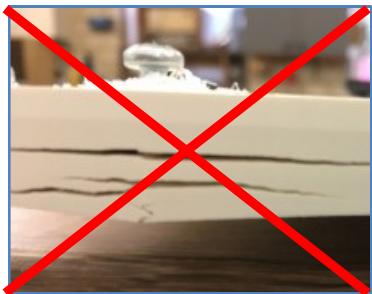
Danger of splitting in screw-holes that are not pre-drilled
